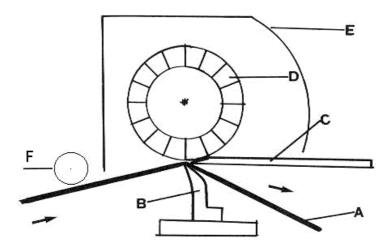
Scheme of a shearing machine: A = fabric; B = wedge; C = counterblade;  $D = helical \ blades$ ;  $E = suction \ unit$ ;  $F = brushing \ drum$ .
